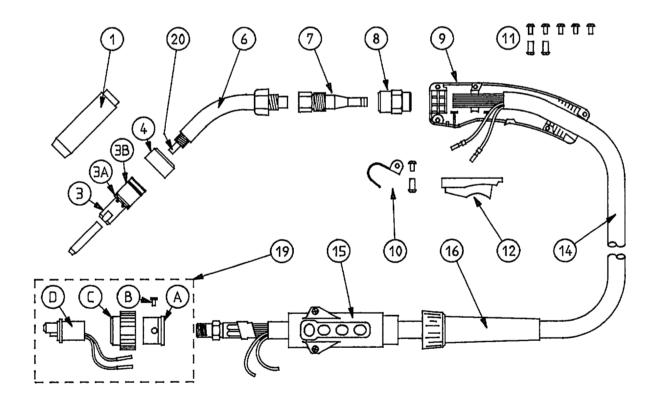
BEQA210AE (200 AMP) GUN CABLE ASSEMBLY
